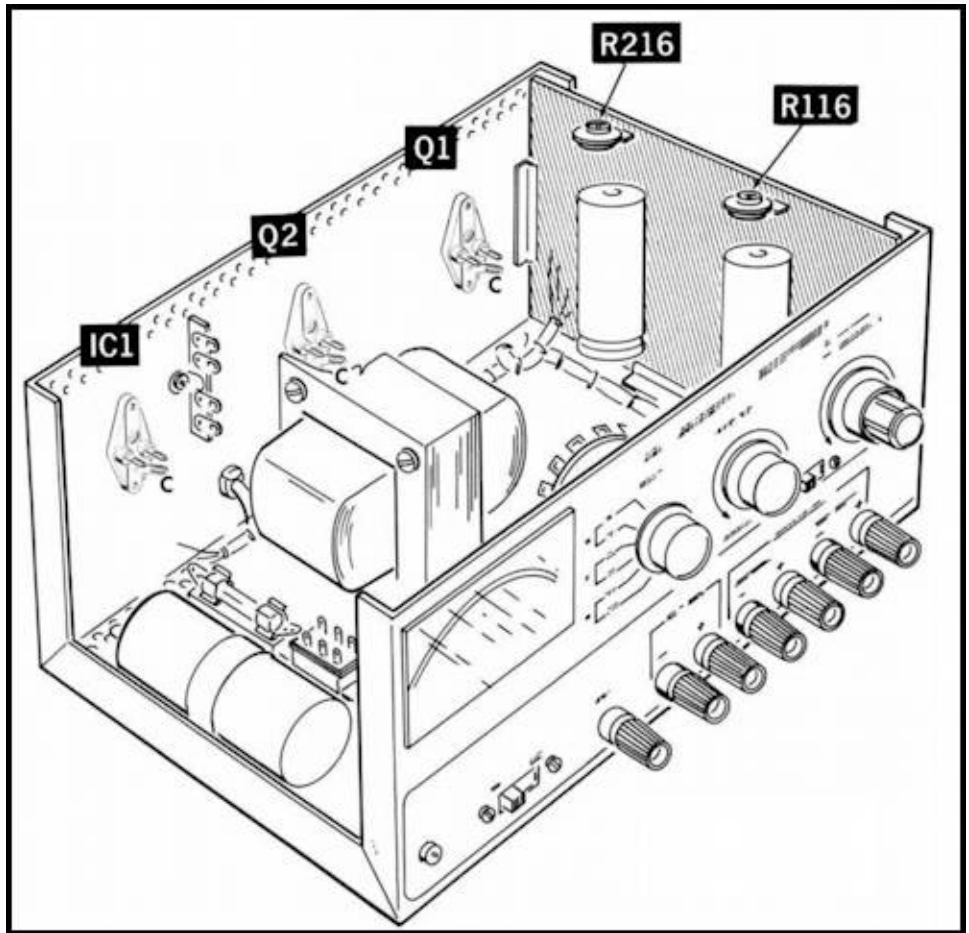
Internal drawing of the IP-2718 showing the major parts placement. Circuit board mounts vertically on right side. (Heath drawing)
